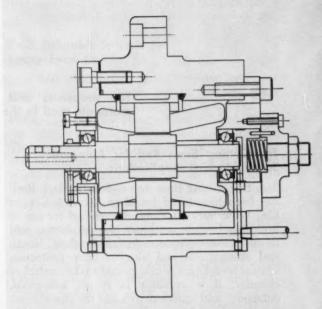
Wheel-head for extremely high-speed operation. The bearings used have symmetrical outer rings, counterbored inner rings, and outer-ring landriding retainers. This construction permits easy lubrication and prevents bearing failure due to the high centrifugal forces encountered.
